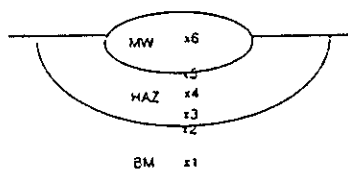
Scheme of imprints of the Vicker's pyramid in the cross section of the weldment
